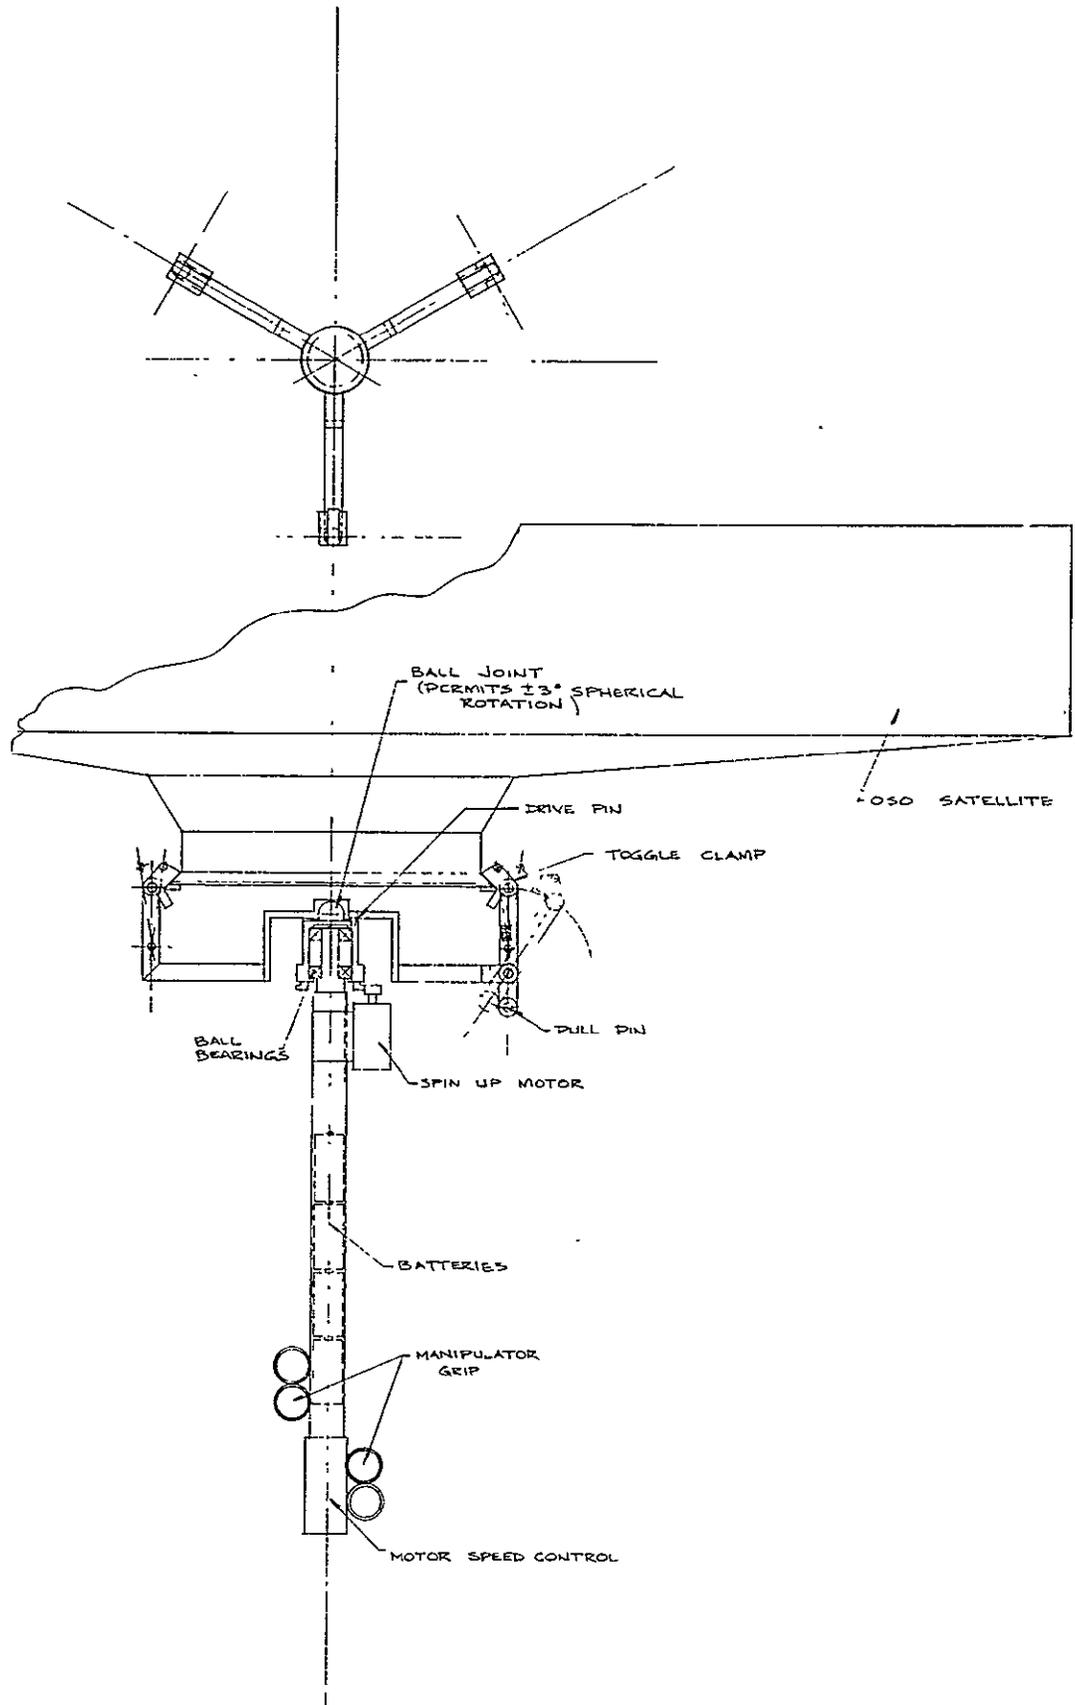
OSO-D Despin Fixture Rotating Attachment Head
